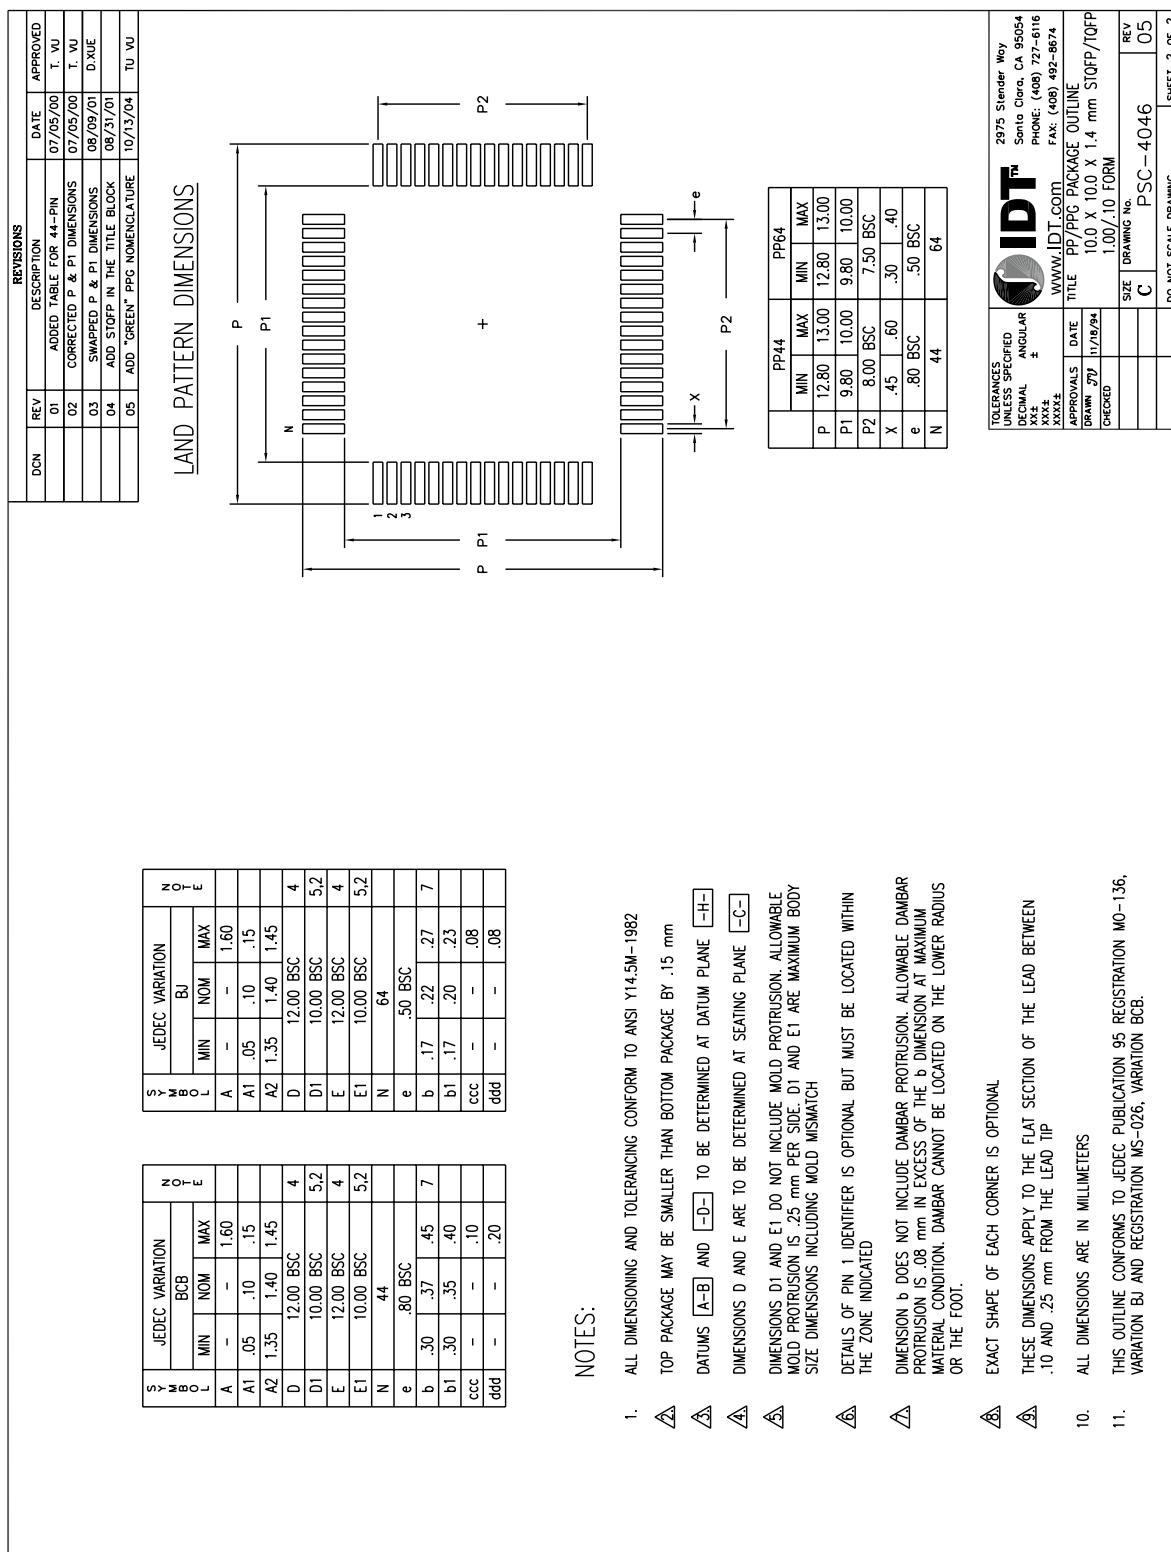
64-Pin PP Package Dimensions (b) (in Millimeters)
